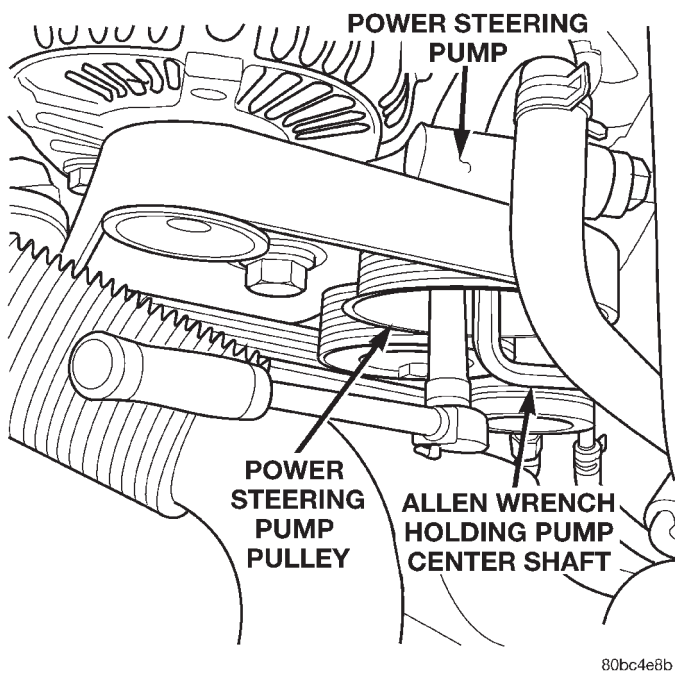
Removing Power Steering Pump Pulley Retaining Bolts
